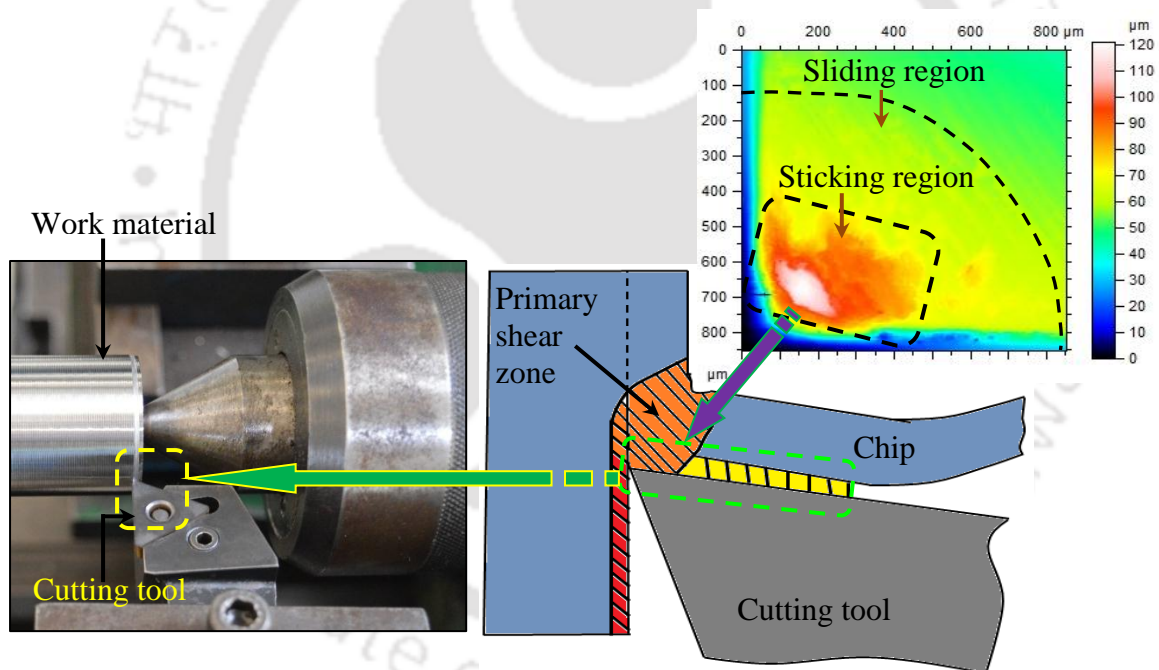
Overview of machining region showing sticking and sliding zones on the cutting tool rake surface
